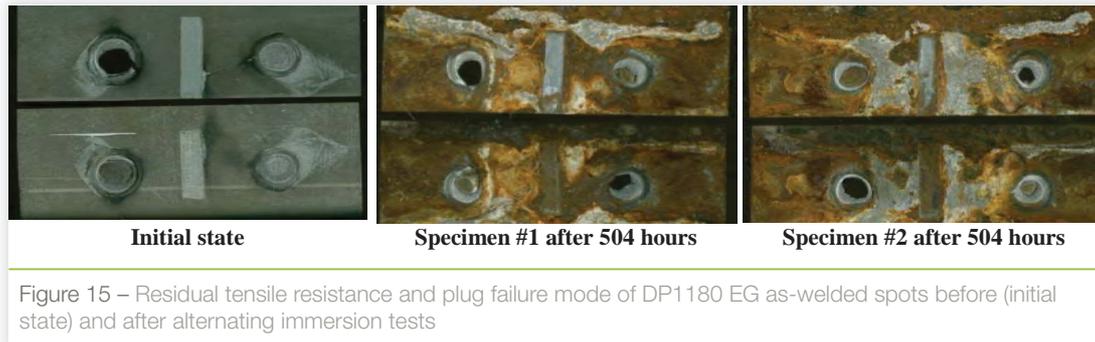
Residual tensile resistance and plug failure mode of DP1180 EG as-welded spots before (initial state) and after alternating immersion tests
